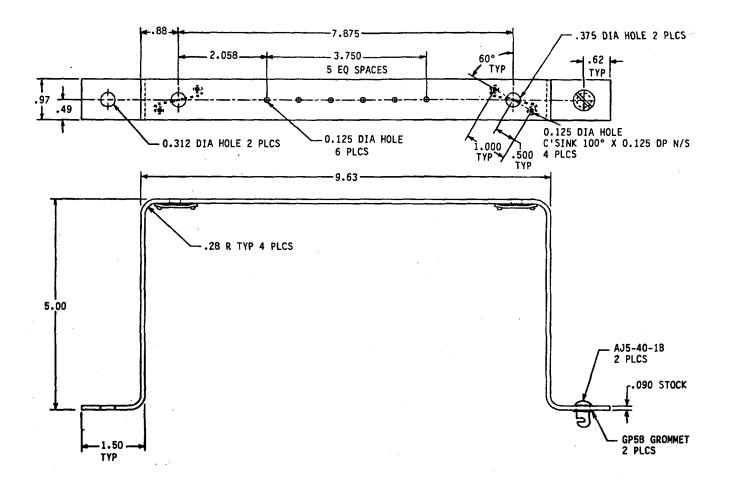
Fabrication of Electrical Harness Assembly, PIN 85SDSCC-D-0007-111
